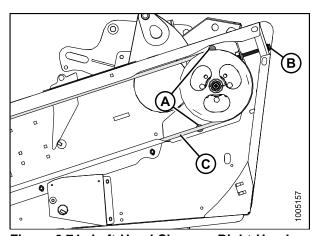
Left-Hand Shown – Right-Hand Opposite for Double-Knife Headers
